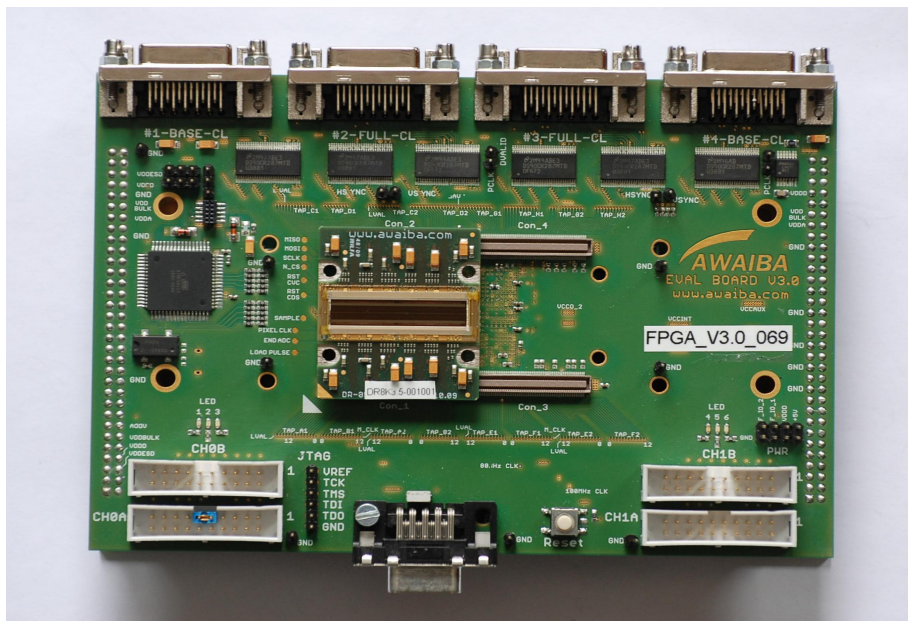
Assembling DR_8K_3.5um on the Evaluation board
